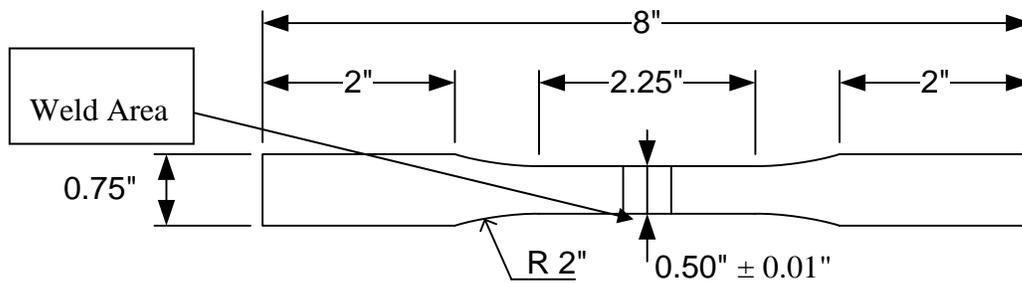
Cross Weld Tensile Test Sample of ERNiCuRu Weld
